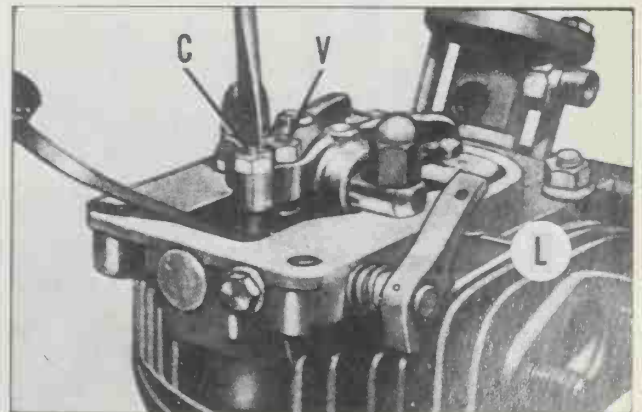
With compression lever (L) in off position, turn adjusting screw (C) so clearance is 0.9-1.1 mm (0.035-0.043 in.) between screw and shaft. Adjusting screw (V) determines valve clearance.
